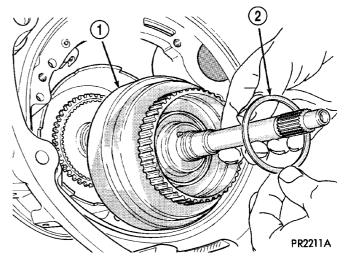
No. 2 Thrust Washer and Rear Clutch
